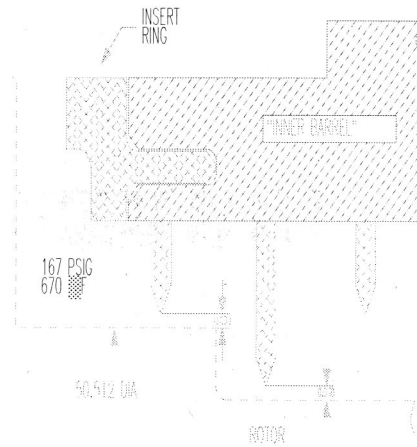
Sketch of compressor discharge labyrinth and “insert ring”
